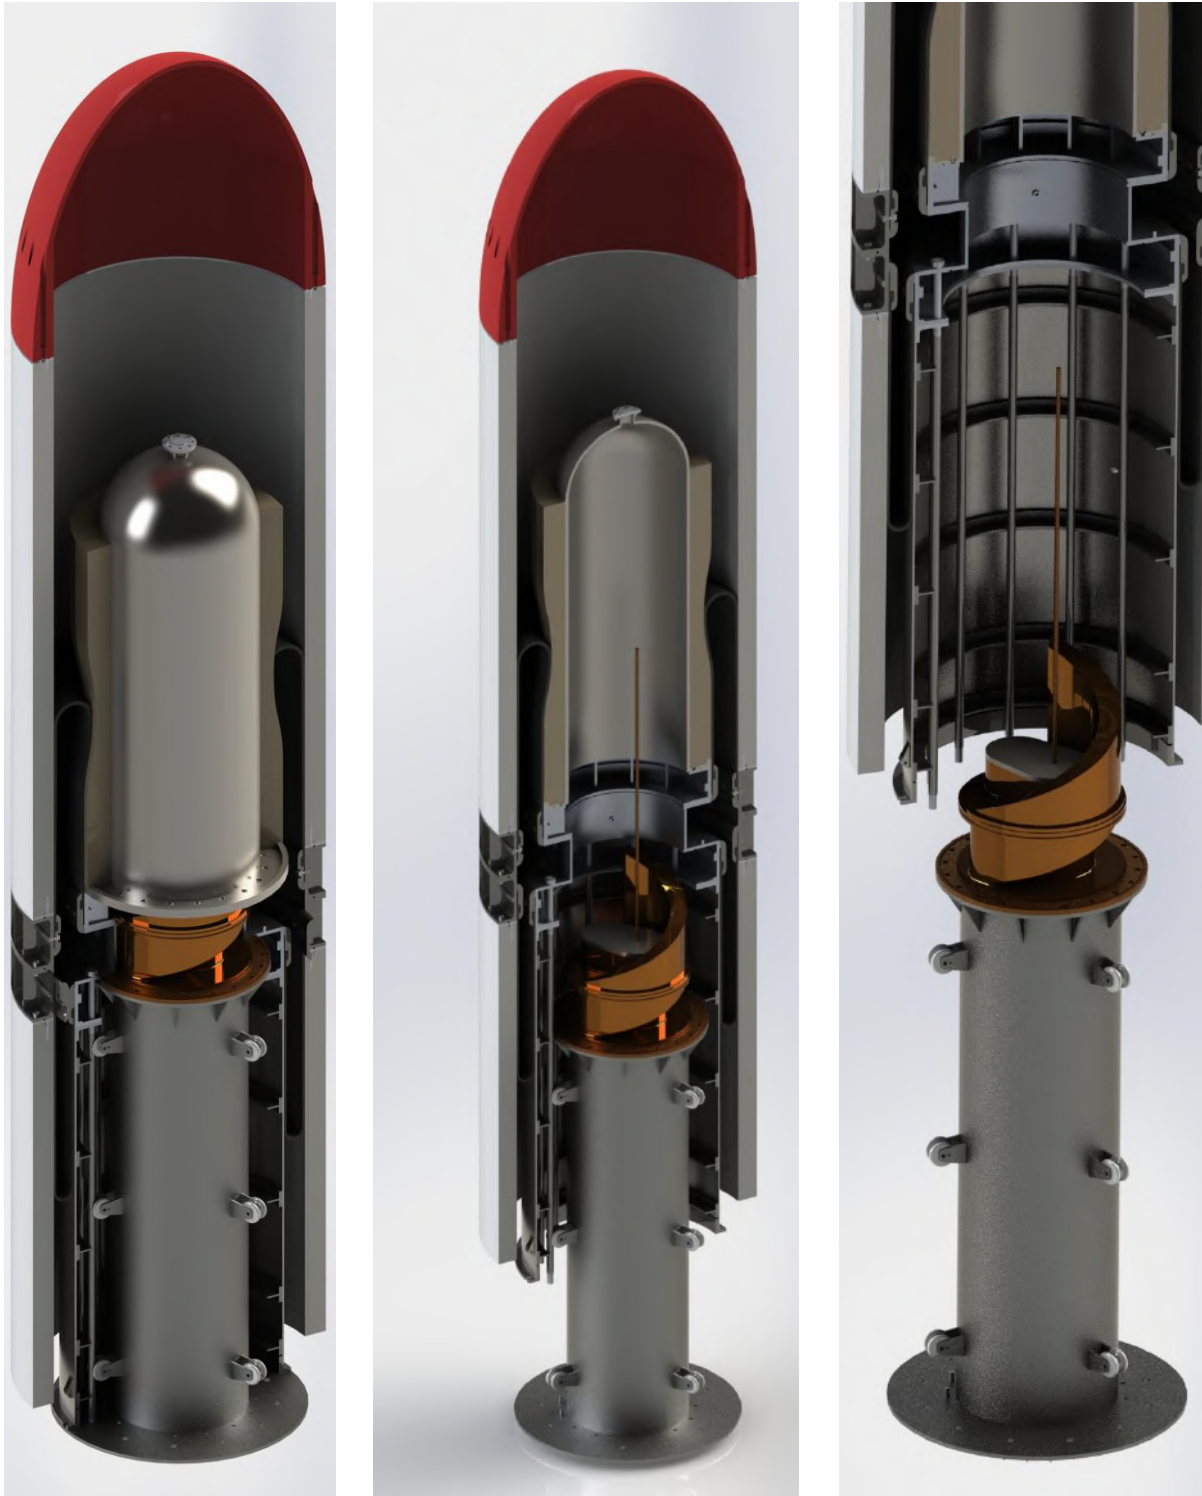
GUIDANCE RAIL SYSTEM FOR COCOON REMOVAL; LEFT: SPRING TANK, TURBINE HOUSING AND COCOON HOUSING AS INSERTED IN THE HULL, CENTRE: CROSS-SECTION OF SPRING TANK AND TURBINE HOUSING; RIGHT: COCOON PARTLY REMOVED.
